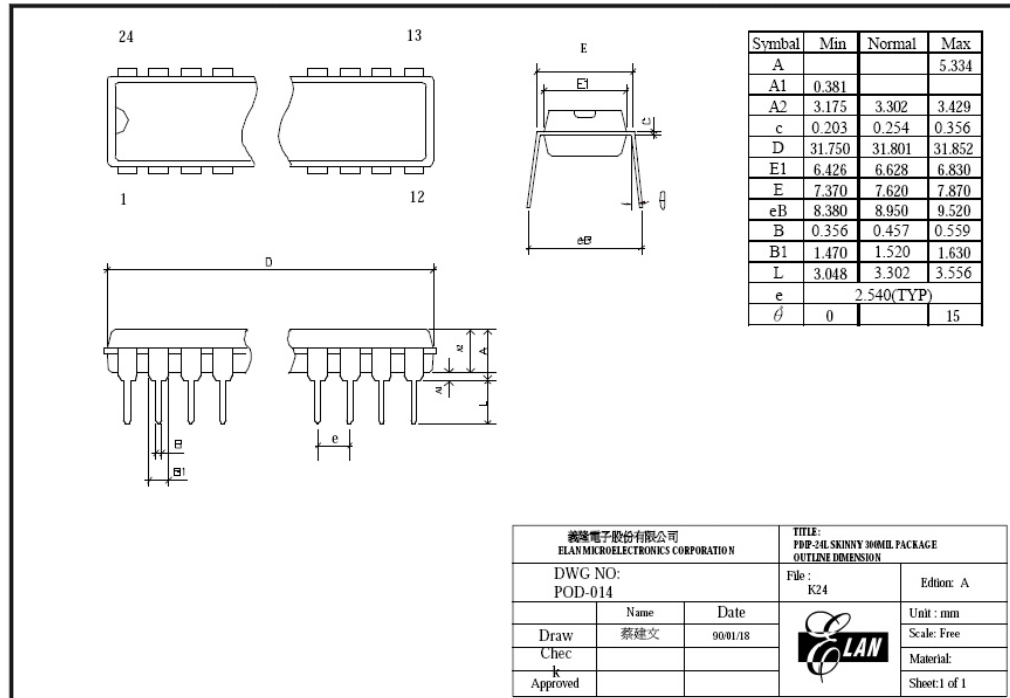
EM78P5840N 24-pin Skinny DIP Package Type
